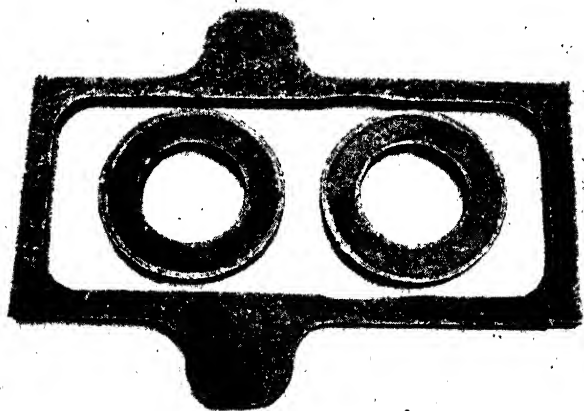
Two of the circular parts are required to every one of the framelike parts. Both types of parts have the same thickness, therefore they can be cut at the same time from the same plate leaving a sizable solid piece of scrap from which still other parts may be cut. (*Courtesy of R. G. LeTourneau, Inc.*)
